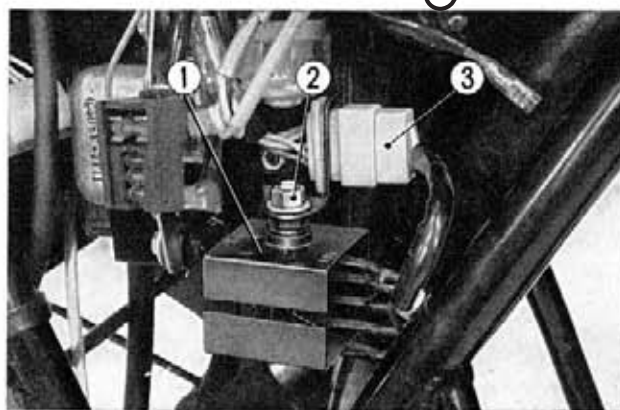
① Silicon rectifier ② Rectifier setting nut ③ Connector
